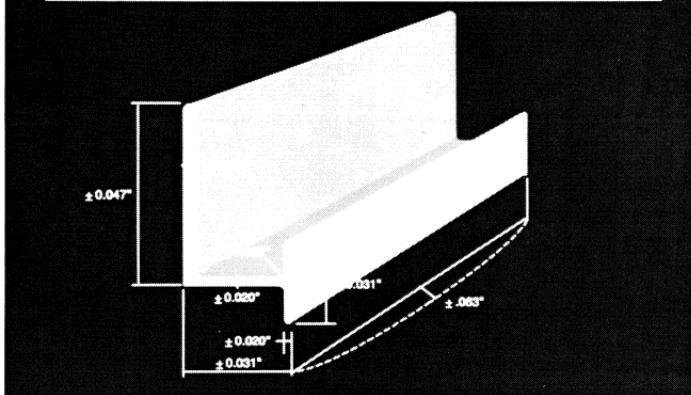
Tolerances used for stainless steel shelf angle.
